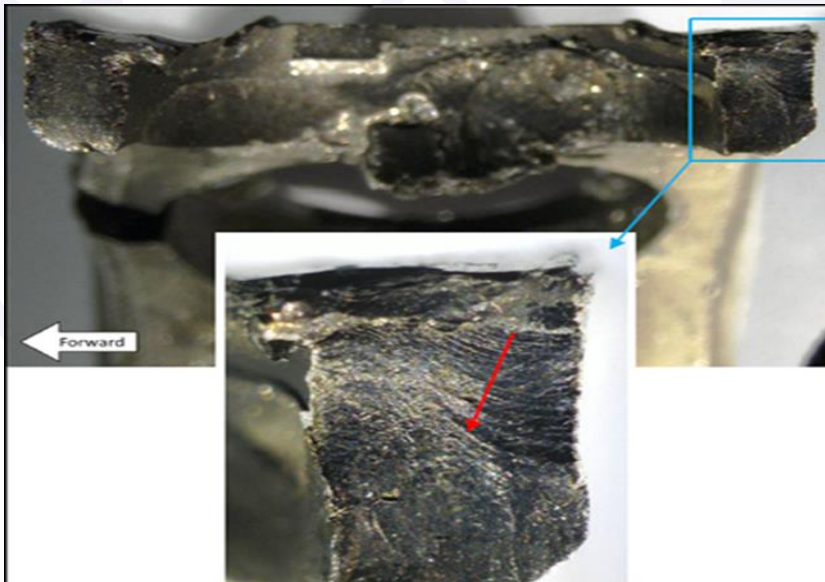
Detailed view of the fractured rails of bearing nº2 showing macroscopic indications consistent with progression of fatigue (red arrow).
